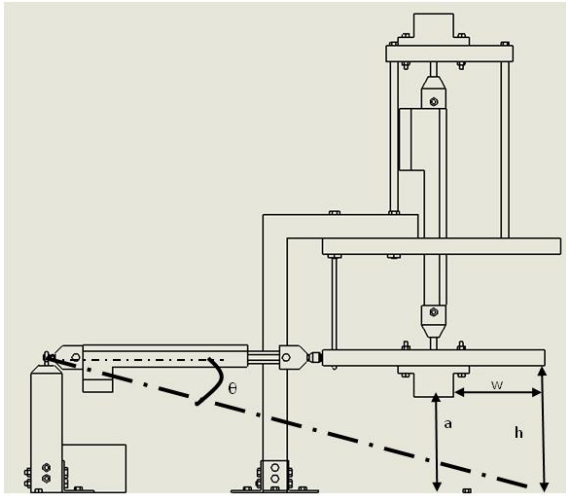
Assembly side view. Available motion of right angle ball and socket joint.
